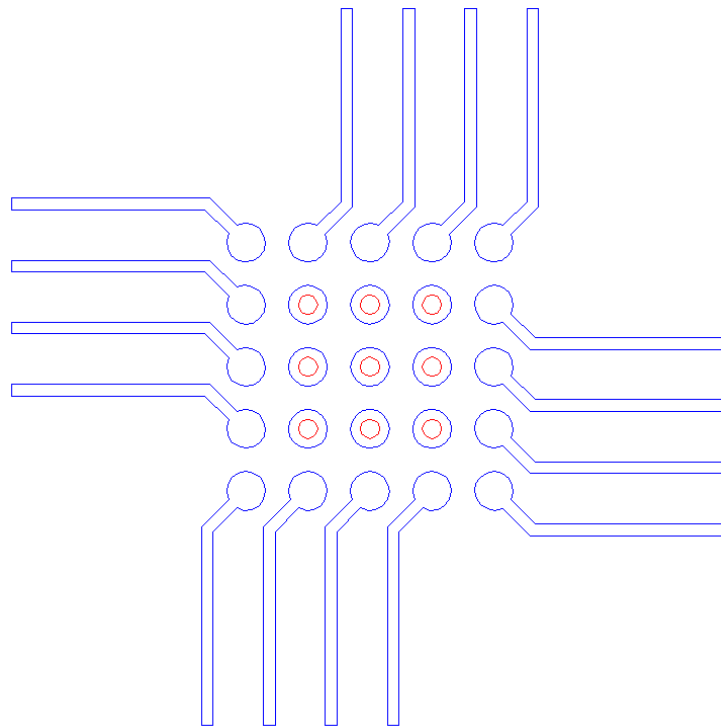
• Suggested Board Layout for NSMD of Soldered Pads for  $\mu$ C81 CSPs (PCB Top Layer)
